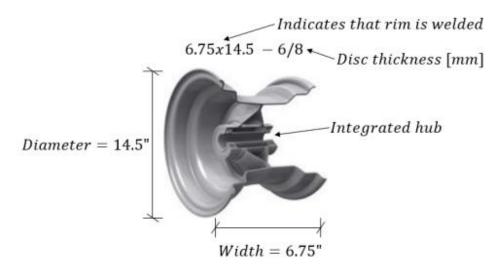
Cross-sectional view of the integrated hub rim with dimensions
